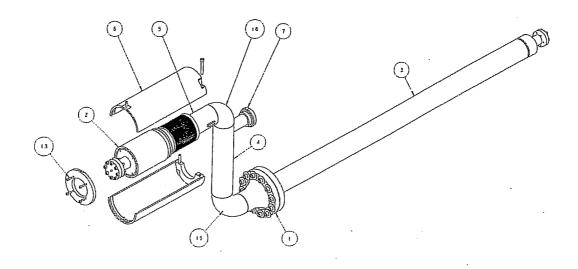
Isometric View of MQX1. 1 - Housing with Lambda Plug; 2 - Test Cap (this is removed for tunnel installation); 3 - Conductor Protection Tube (this is removed for attachment to DFBX); 4 - Vertical Pipe Section; 5 - Horizontal Section (this connects to magnet); 6 & 13 - Bellows Restraint (this is removed for tunnel installation); 7 - Helicoflex Sealing System; 15 - Long Radius 3 IPS Weld Elbow; 16 - Short Radius 3 IPS Weld Elbow.
